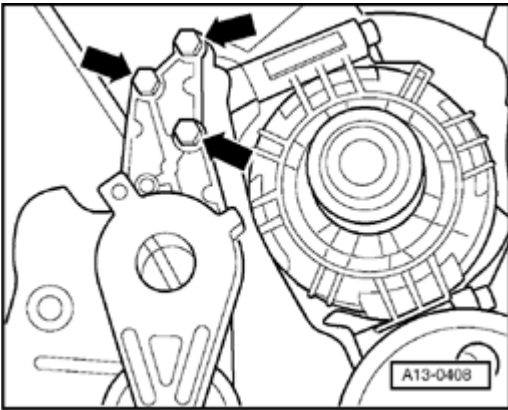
Removing/Installing Ribbed Belt Tensioner
